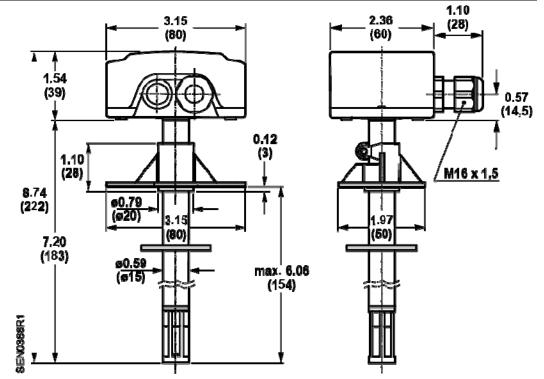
QFM3160 Duct Sensor and Mounting Flange Dimensions in Inches (Millimeters).
